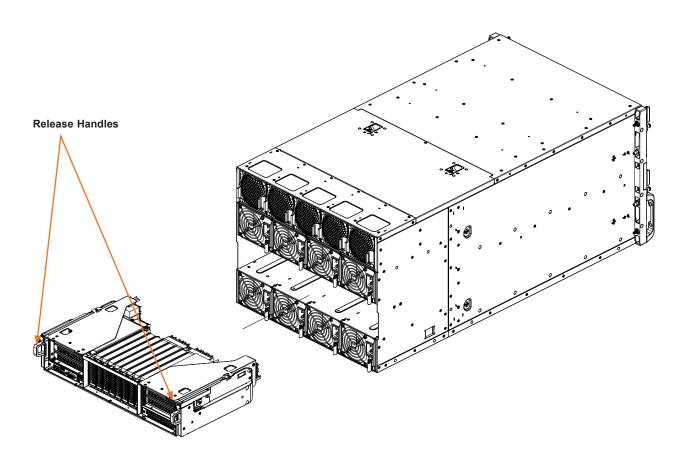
Chassis Rear, Removing the PCle Expansion Tray
